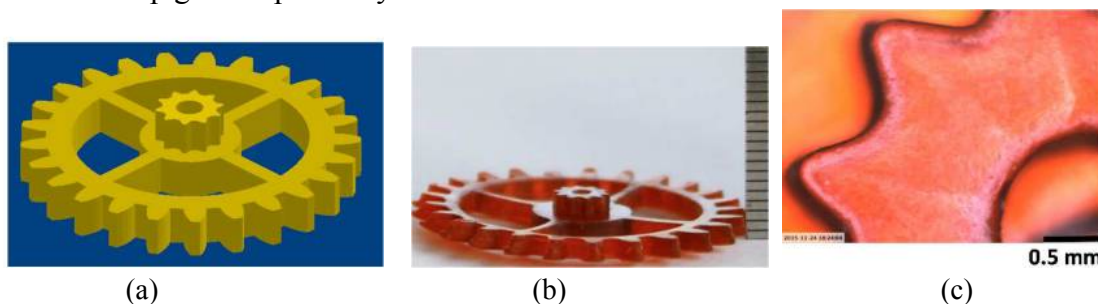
Gear test case: (a) STL model; (b) Built part; (c) A microscopic image of the top gear
